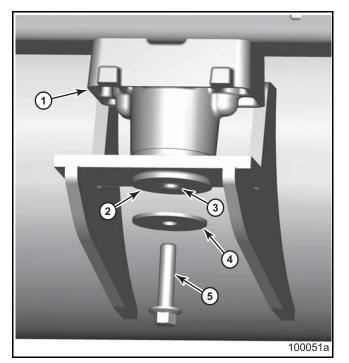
Tank Outboard Front Frame Bracket Bolt and Washer
